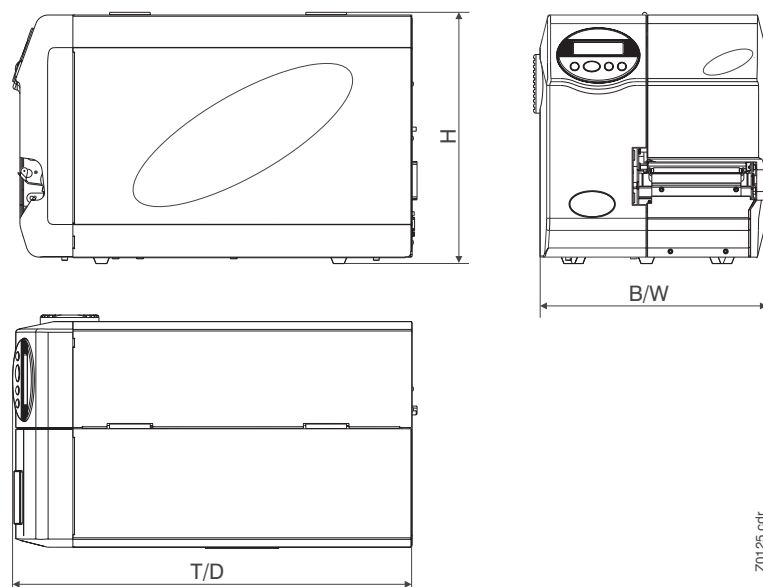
Dimensions of the 64-xx series standard printers. Refer to the following table for the values.
